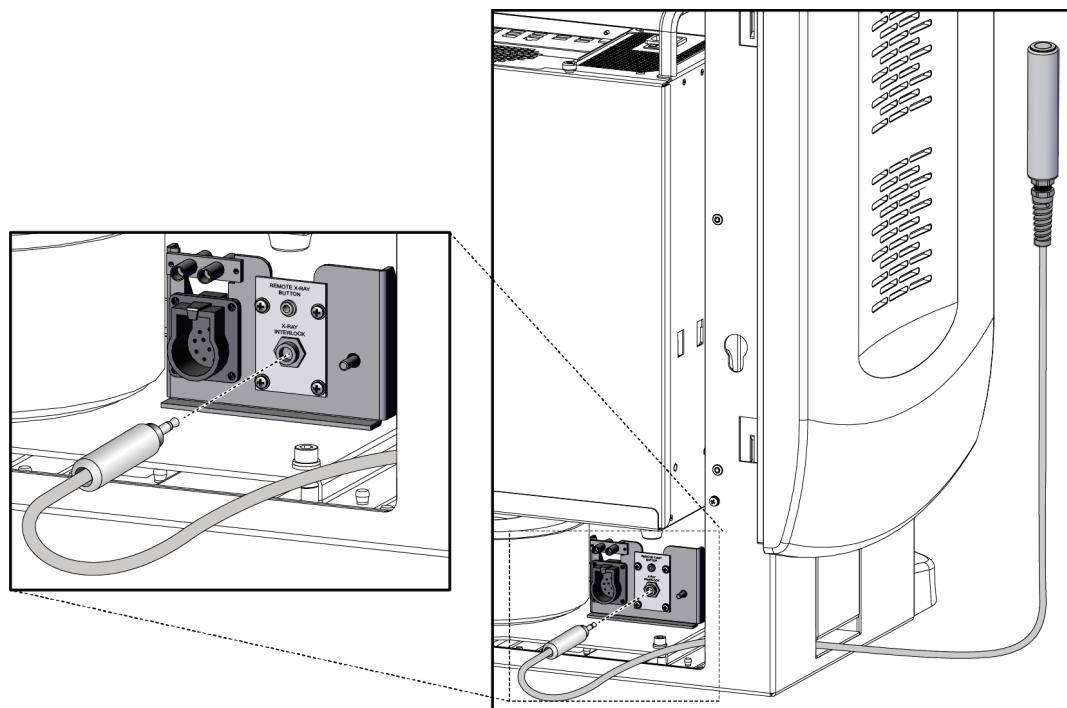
Removal/replacement of remote x-ray switch cable (shows left side access)
